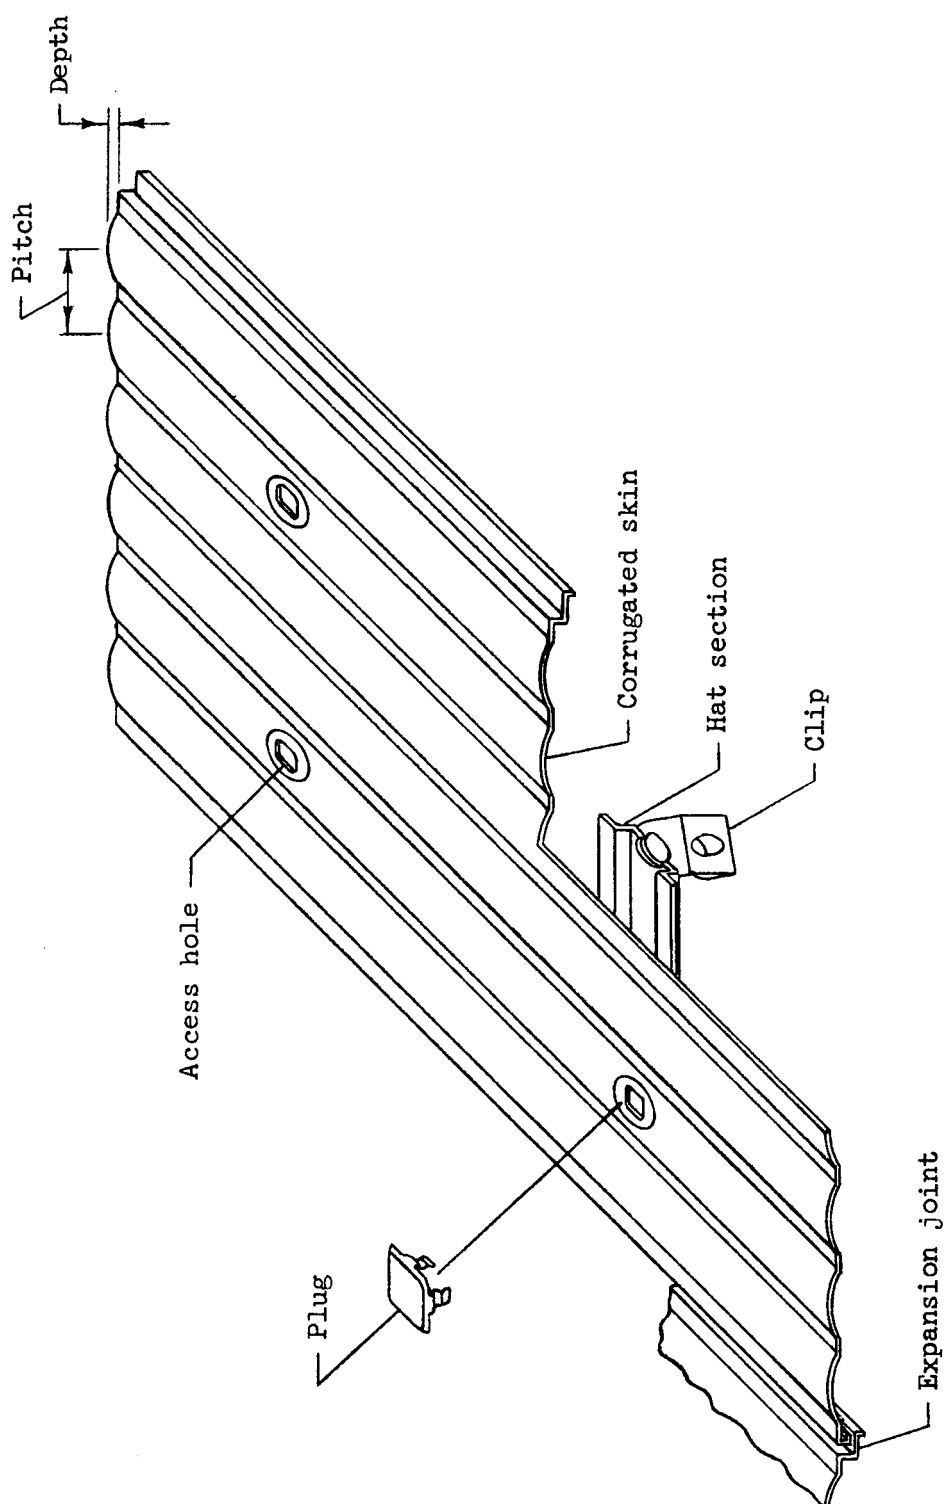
Heat-shield design selected for flat- and curved-shield configurations fabricated from tantalum-alloy sheet.
